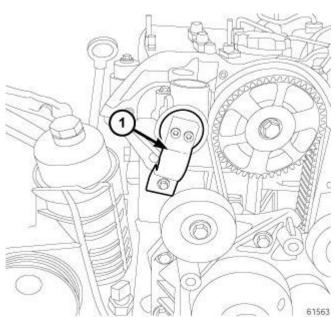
CAMSHAFT LOCKING TOOL INSTALLED Courtesy of CHRYSLER LLC
